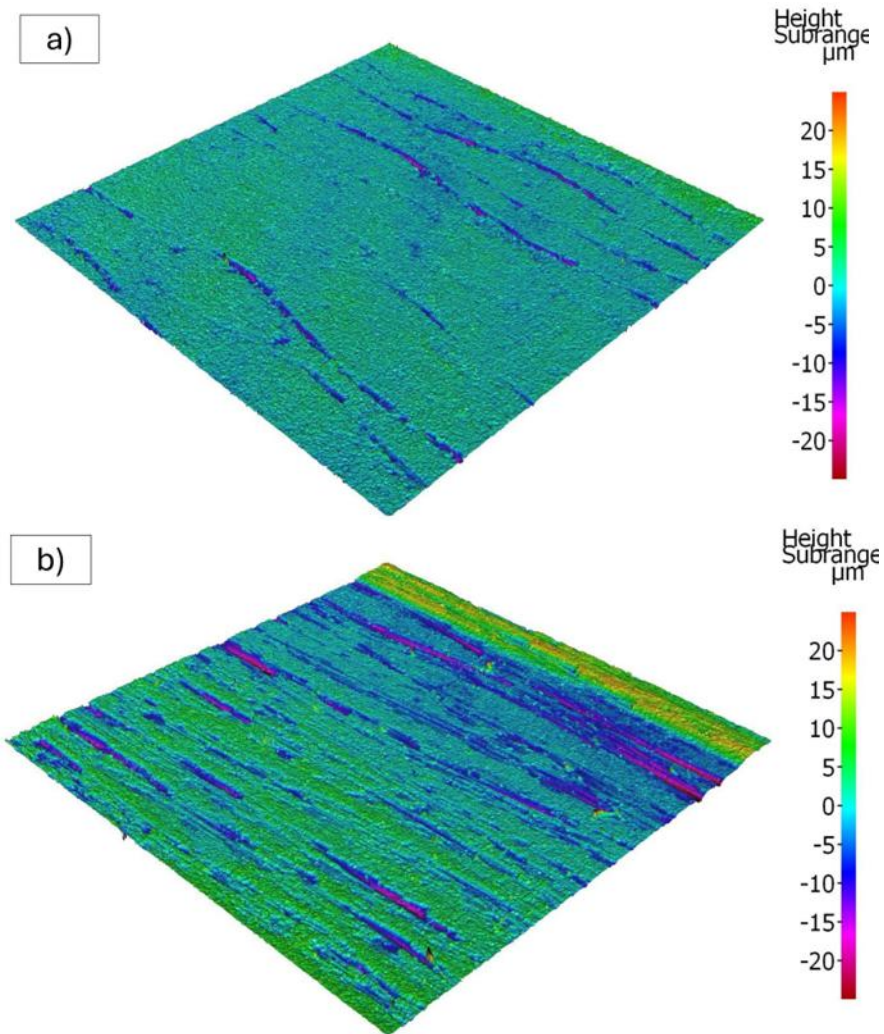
Machined surface topography of the CFRP after milling 3000 mm in dry cutting condition with a cutting speed of (a) 75 m/min (b) 100 m/min.
